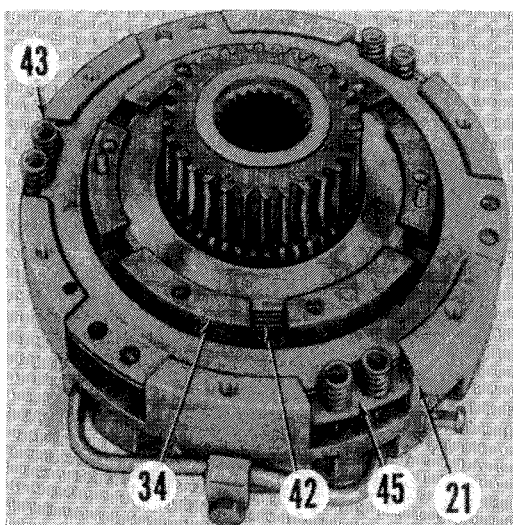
When reassembling, first brake separator plate (45) is installed over return spring guide pins. Remainder of separator plates are installed with tangs located in housing slots that do not have guide pins.
